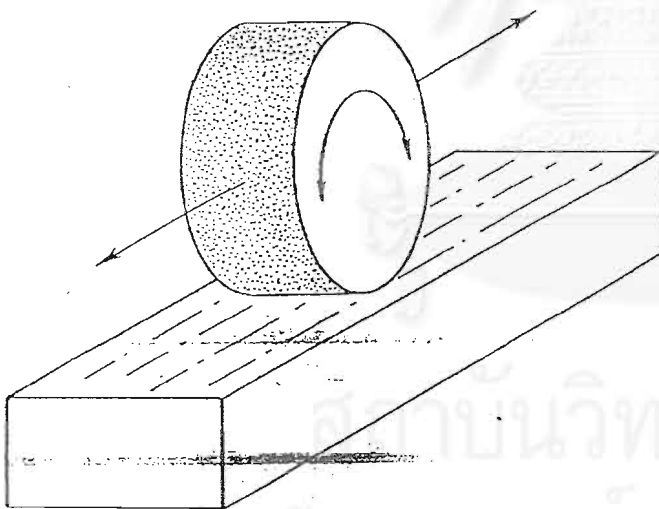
Surface Grinding Parallel to the Specimen Longitudinal Axis
